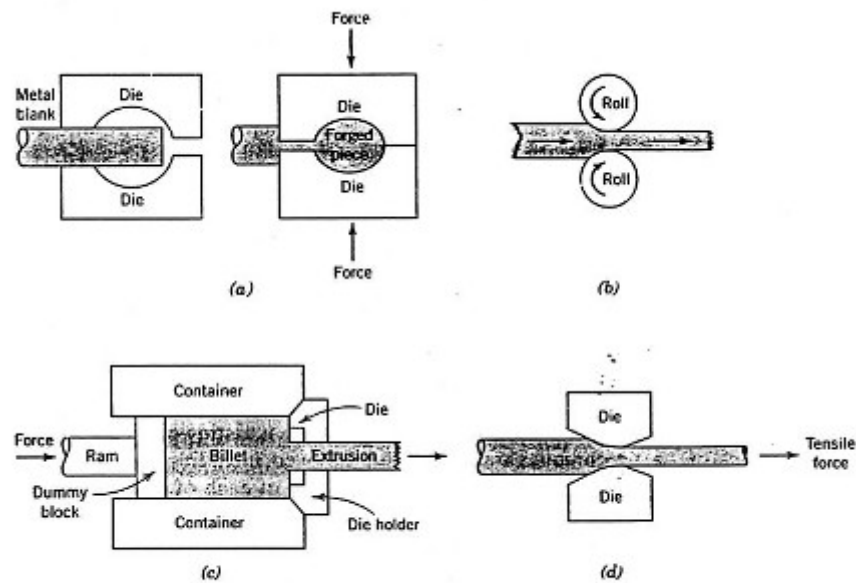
Metal deformation during (a) forging, (b) rolling, (c) extrusion, and (d) drawing.
